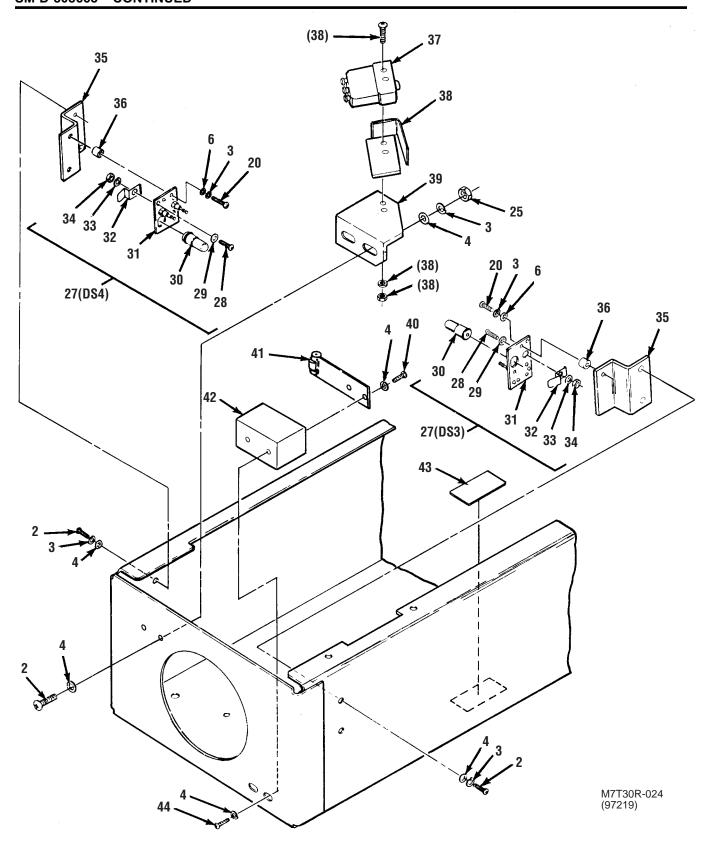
Group 04D0101 Temperature Controller Assembly SM-D-808663 (Sheet 2 of 2)
